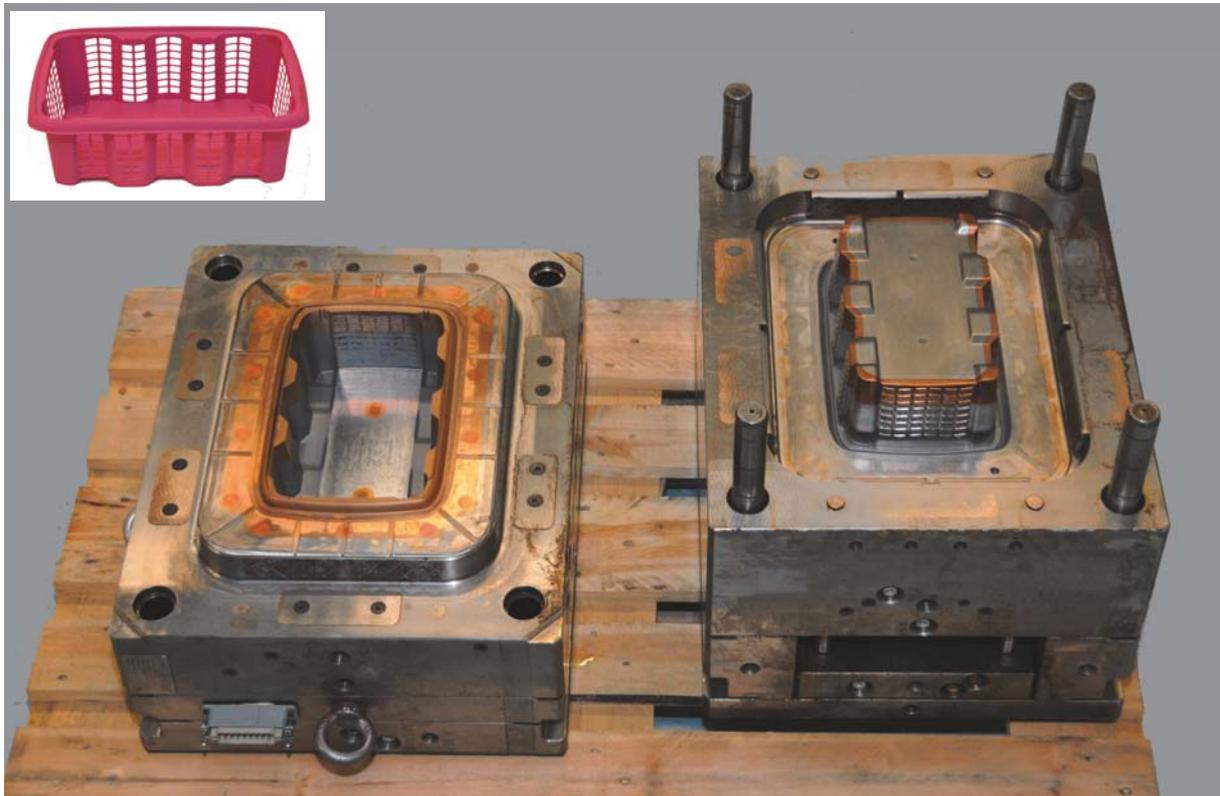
Here is an example of a two-plate mold with one cavity used to manufacture the basket shown in the picture at the top left corner. It is easy to see that the right half is the movable one, since the ejector plate (bottom) can be seen here. The left half is fixed and has a hot runner system integrated. The four columns are used to center the mold halves together.
